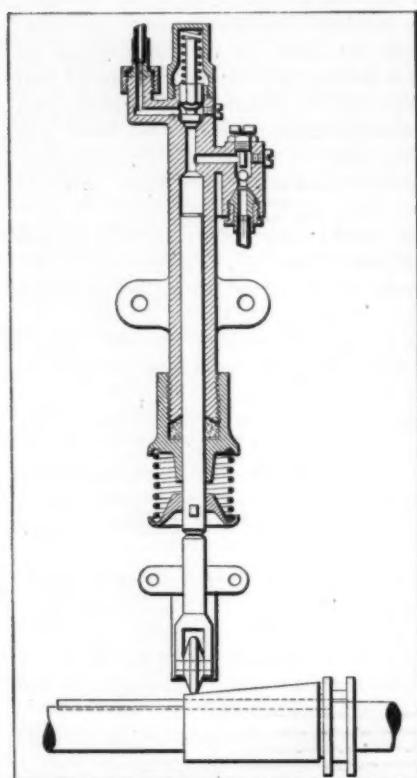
Fuel pump showing sliding cam contrived to alter the stroke of the plunger at will
